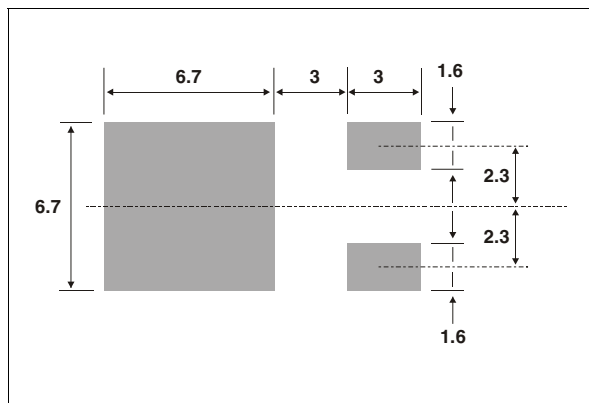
DPAK Foot Print Dimensions (in millimeters)
